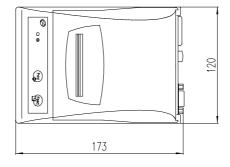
shows the dimensions of the desk printer DP24-40 H with autocutter, while figure 4.2 shows the dimensions of same printer without autocutter.
